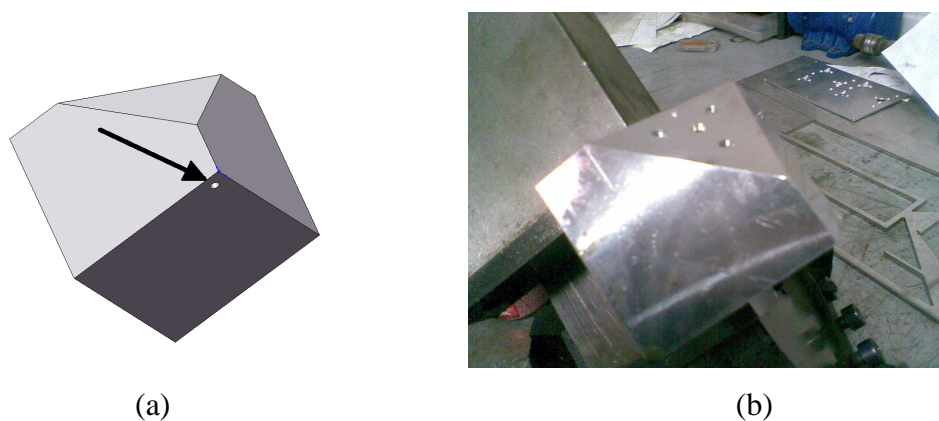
Manufacturing process of Link5: (a) CAD representation of first edge removing, (b) Manufacturing process of first edge removing
